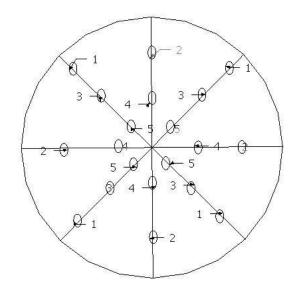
Mould plate, $D = \emptyset$ 300mm.
